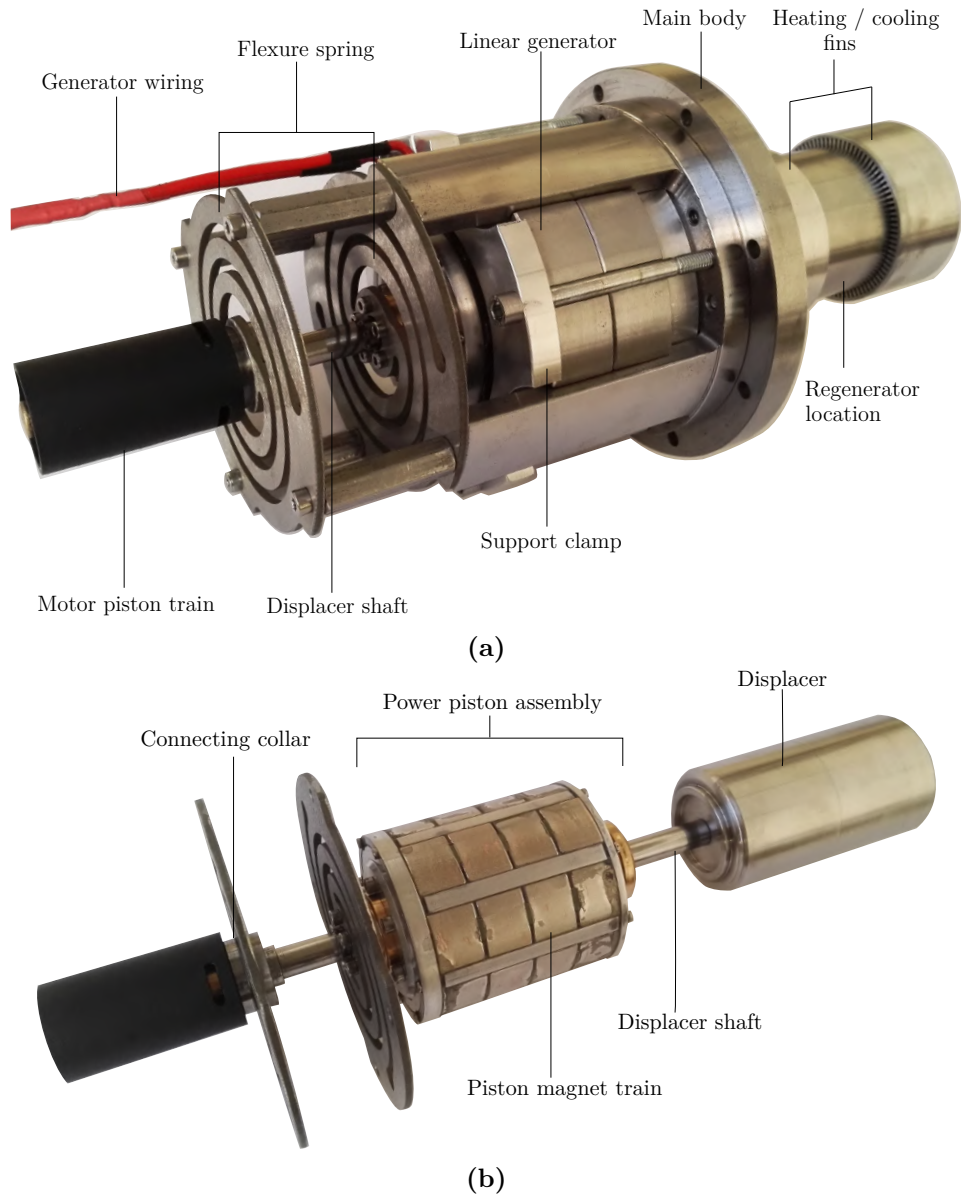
Photographs of (a) the assembled engine internals and (b) the displacer and power piston assemblies (excluding the internal sensor wiring)
